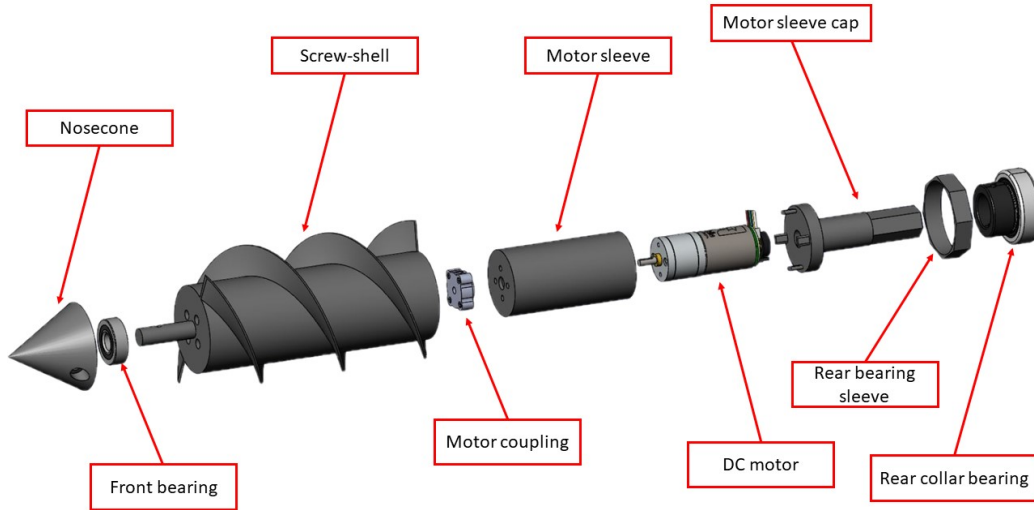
Exploded View of Screw pontoons with Key Features Labeled.
